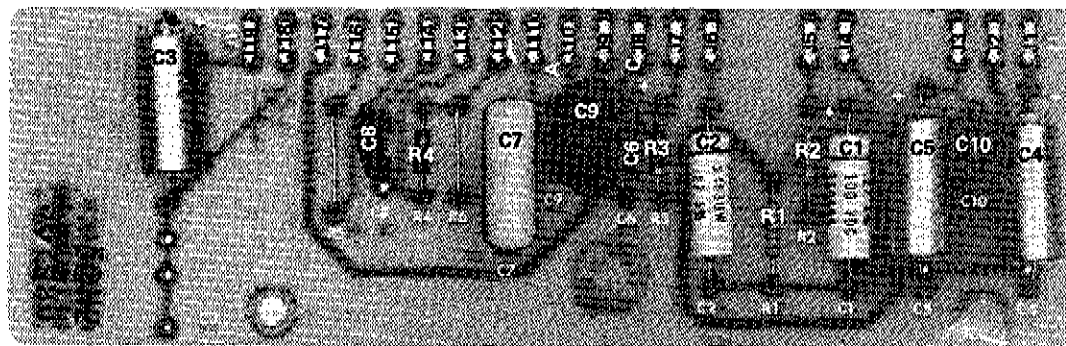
PCB ASSEMBLY, 50 Hz (-02 Option)
